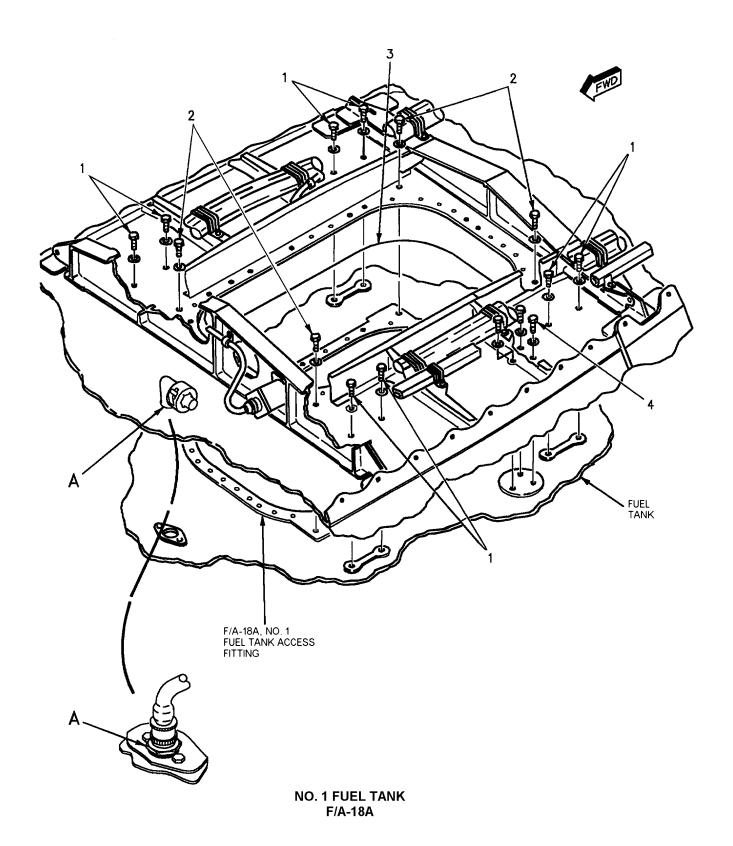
Fuel Tank Access Fittings (Sheet 1)
